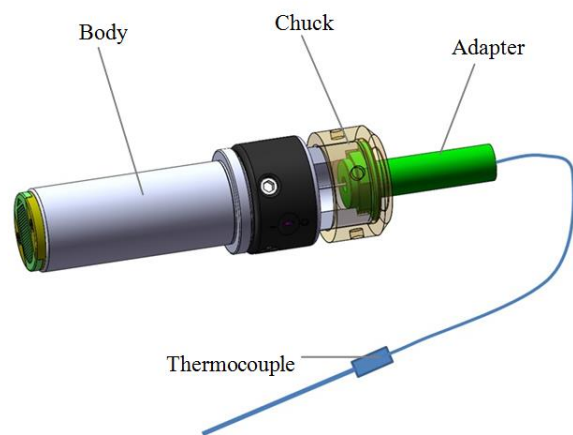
Dual-spindle rotating bending fatigue machine YRB300L (chucking parts and specimen)
